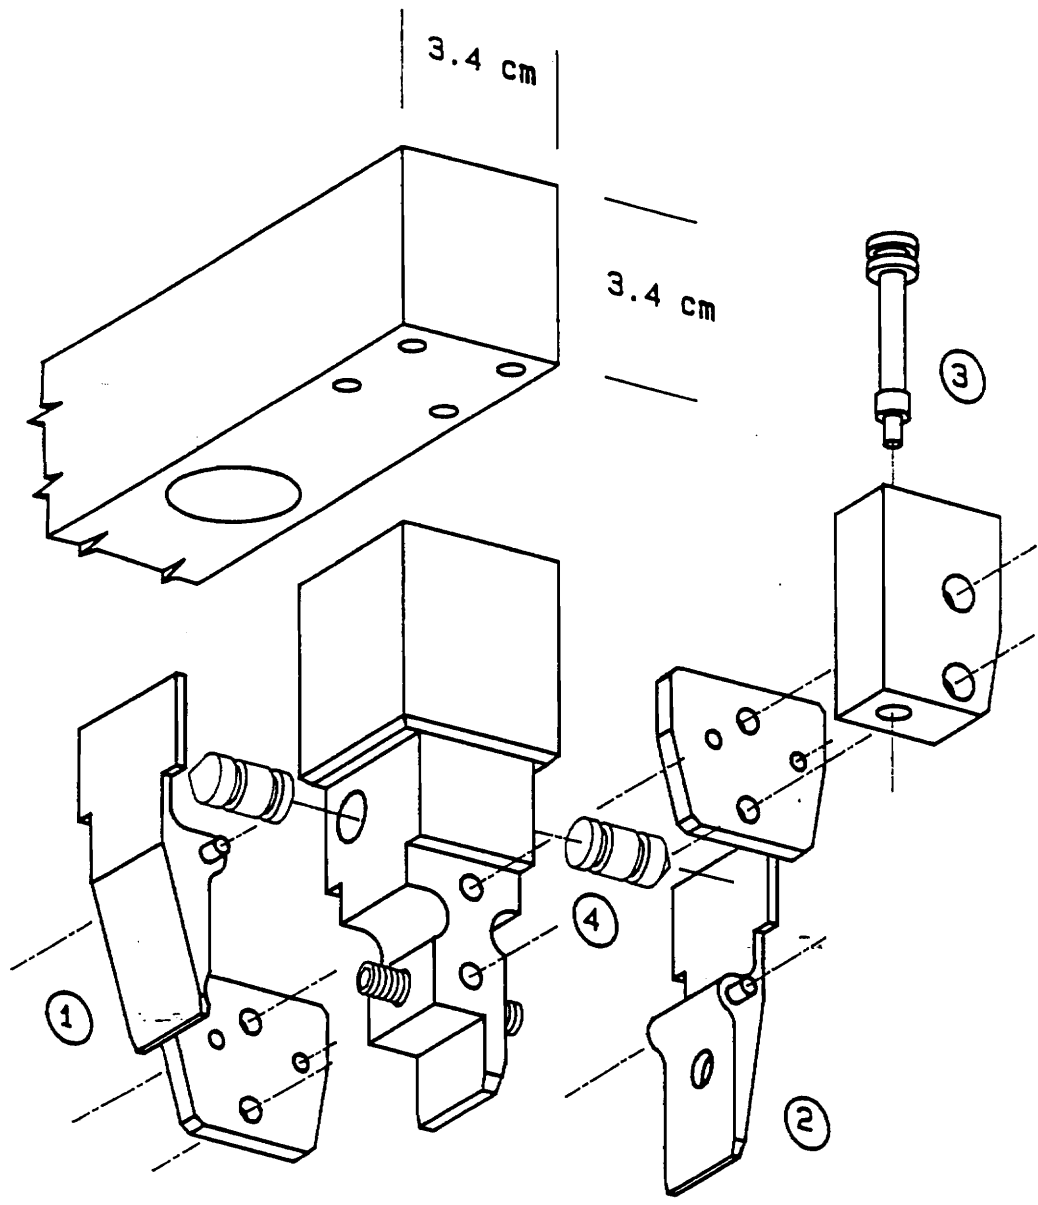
Coil, Lever and Handle Assembling Gripper (From reference 11)
